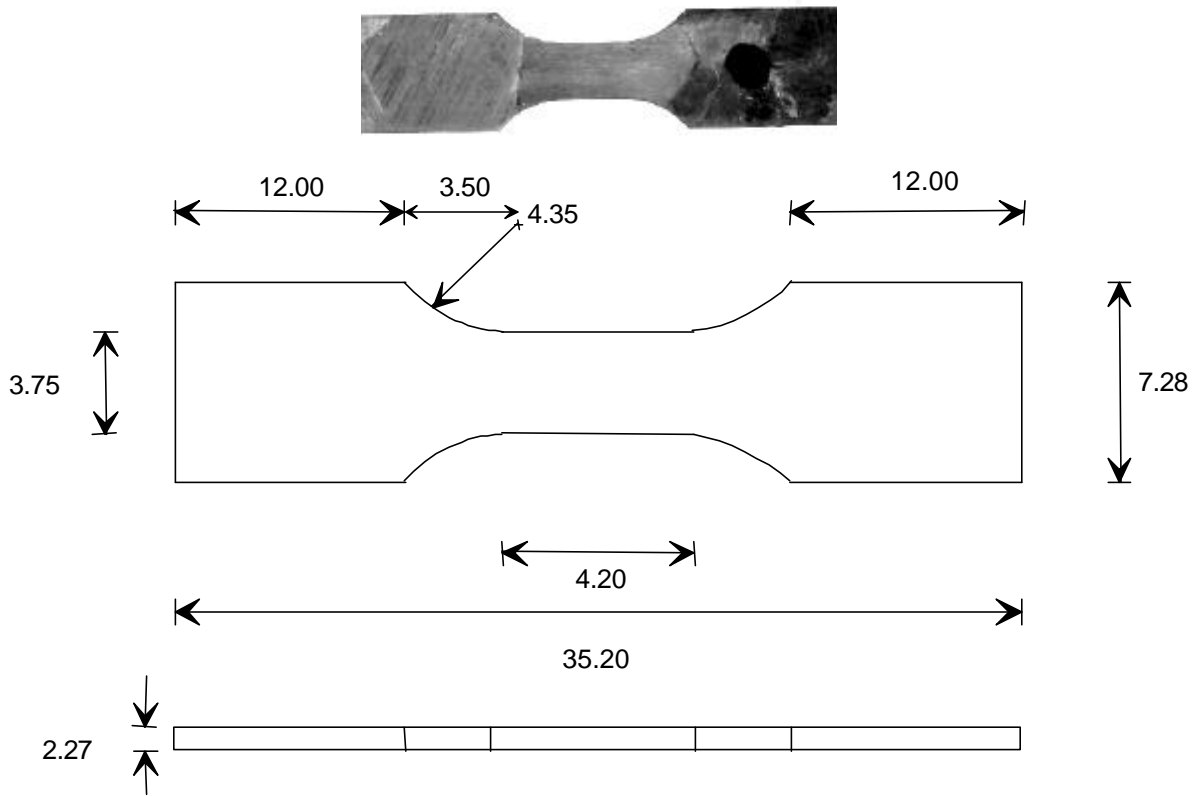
Photograph of specimen and specimen drawing. (note: all dimensions in millimeters)
